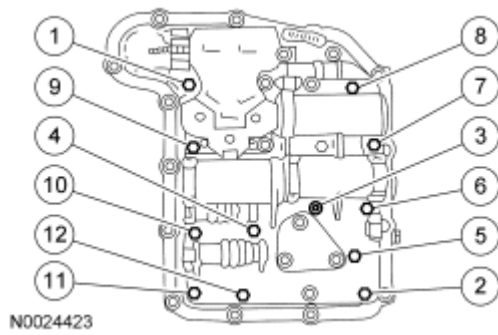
Main Control Valve Body Mounting Bolt Tightening Sequence
